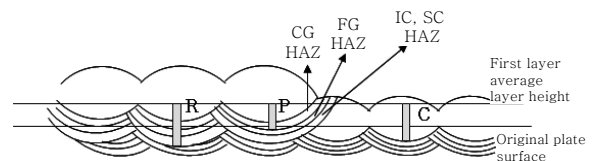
Tempering conditions between two deposited weld layers
